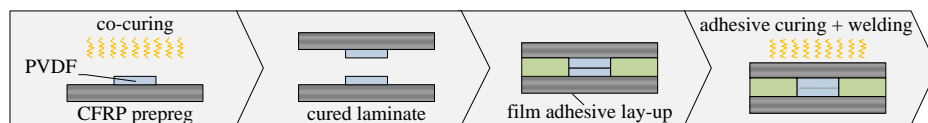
Manufacturing steps for hybrid (bonded & welded) joint
